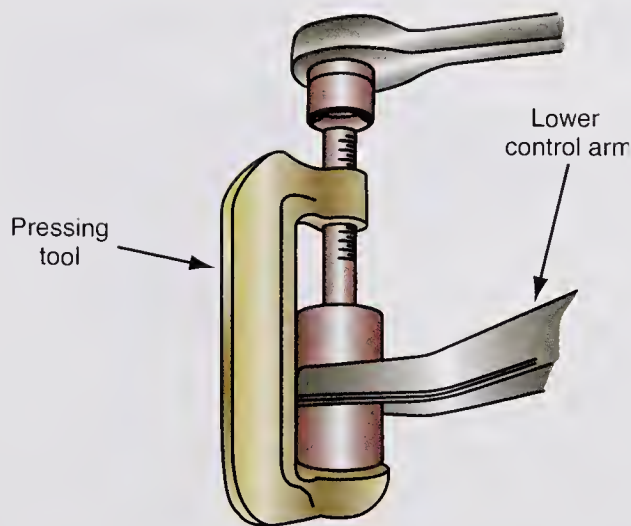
Removing the pressed-in ball joint from the lower control arm.
